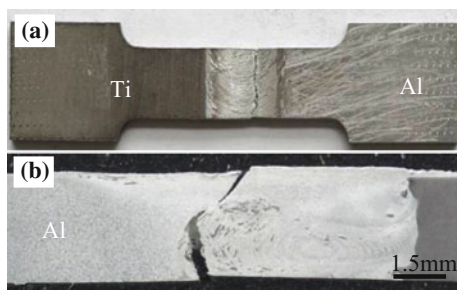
Specimen after the tensile test: a Top surface of tensile specimen; b optical image of a cross-section of joint
